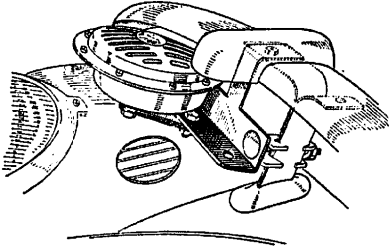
Fixing a horn by means of holder as shown in Fig. 22 and clamping holder LEBE 54 L 6 Z
